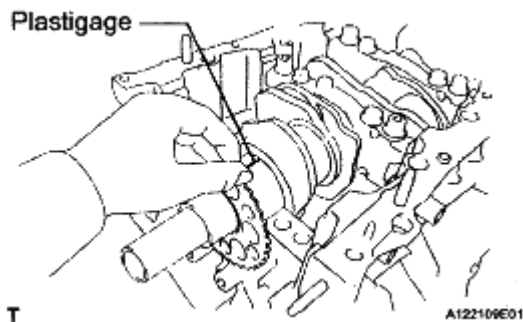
Laying Strip Of Plastigage Across Each Journal
